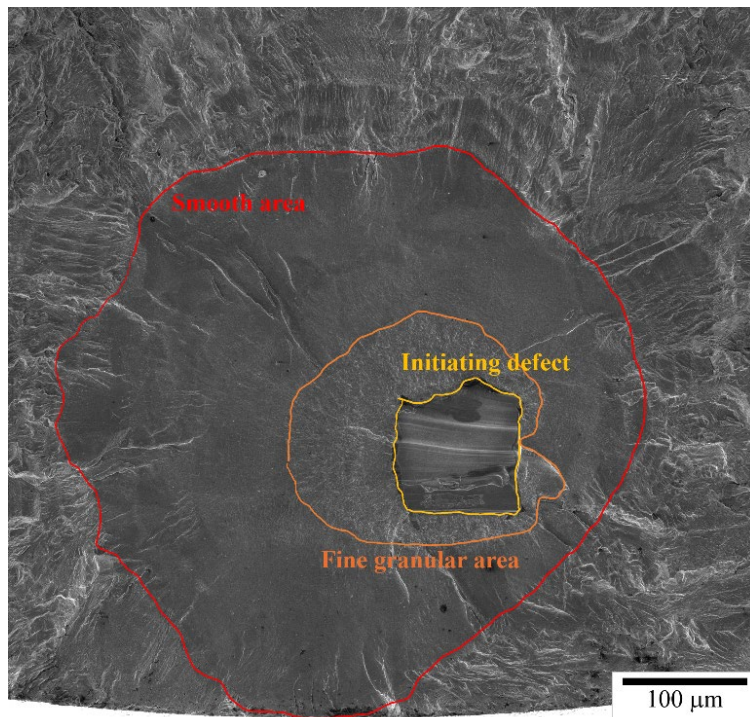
Fracture surface of a CCV-cu specimen highlighting the fish-eye seen during crack growth in vacuum. The fish-eye for these samples is made up of the initiating defect, the fine granular area (FGA), and the surrounding smooth area (SA).
